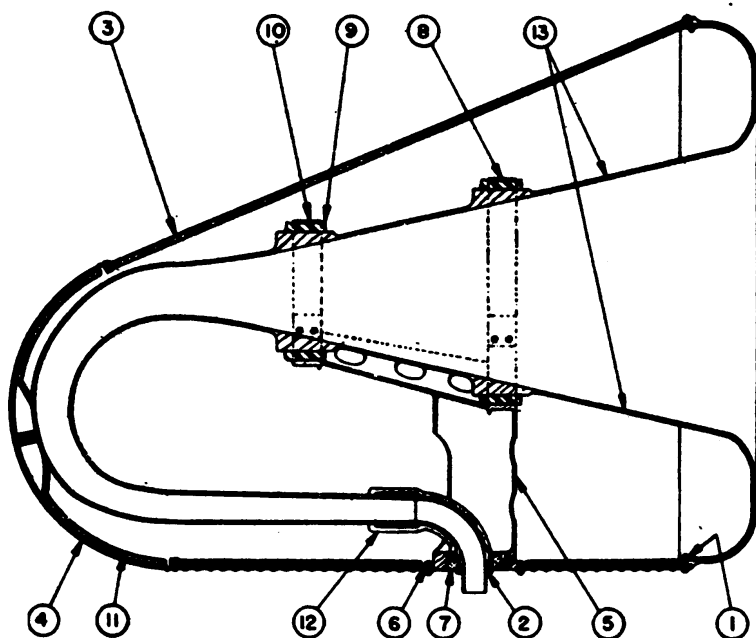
CROSS SECTION OF HORN ASSEMBLY.
